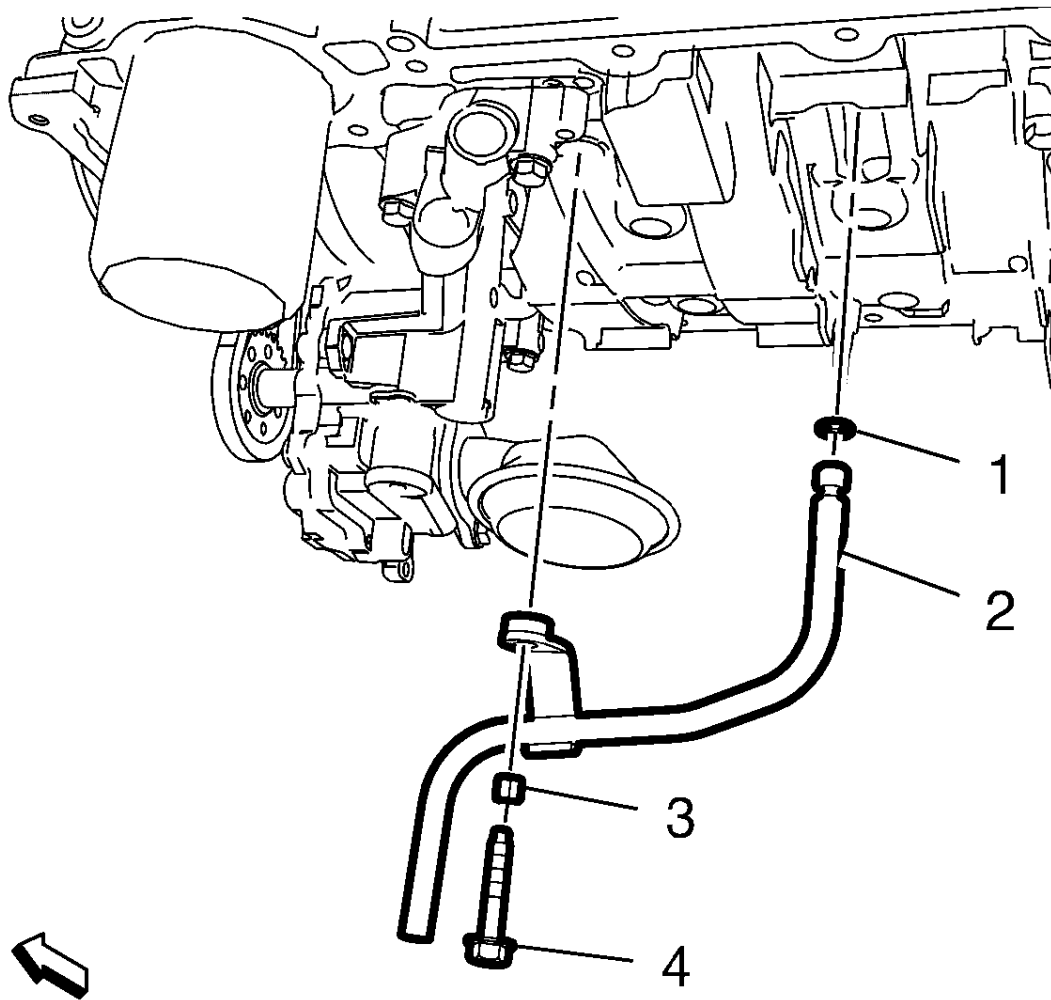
Positive Crankcase Ventilation Oil Separator Drain Pipe, Bolt And Seal
